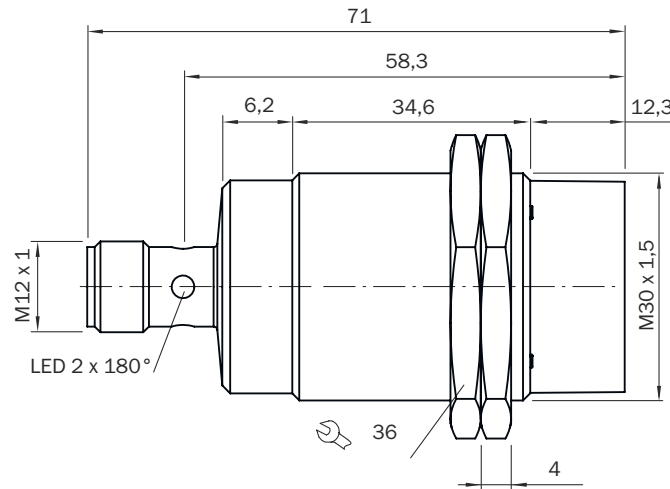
IME2S30-\*\*N\*\*C0 dimensional drawing
